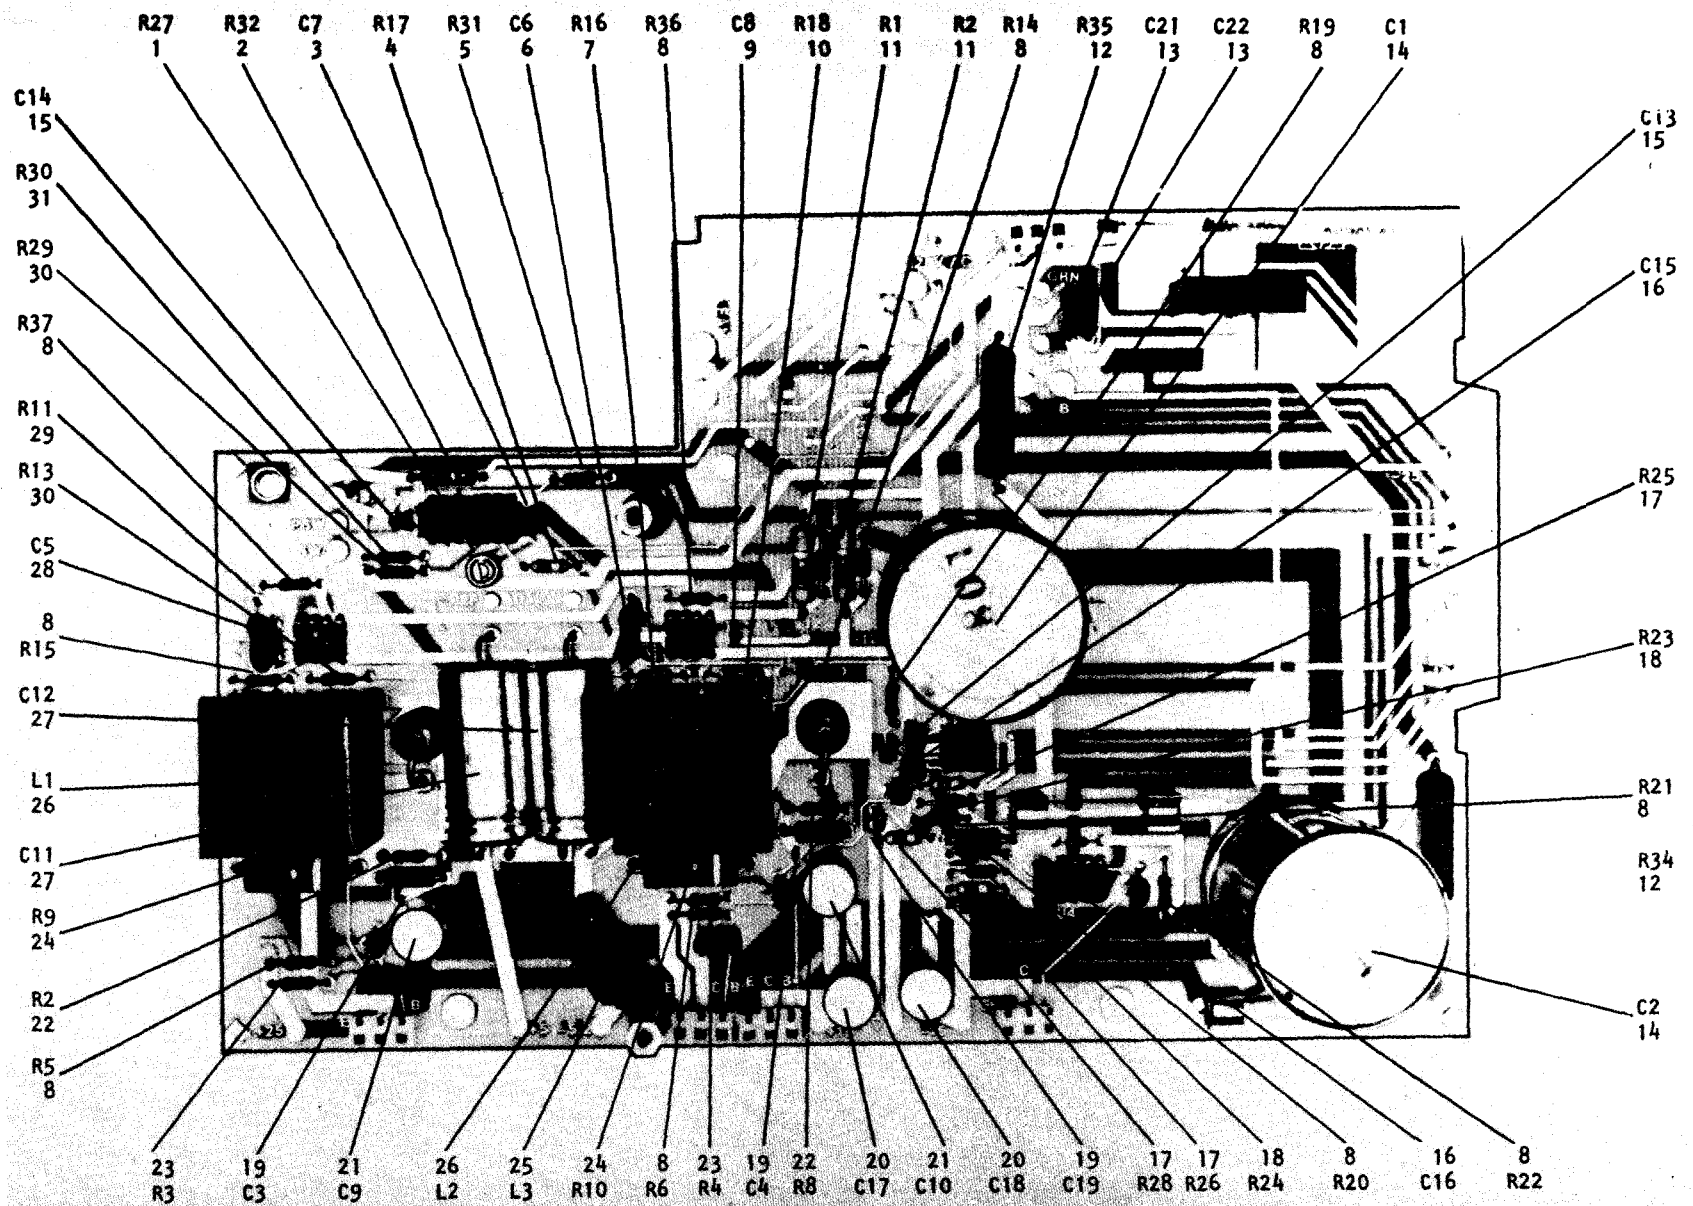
A1 Circuit Card Assembly (Sheet 4 of 4).
